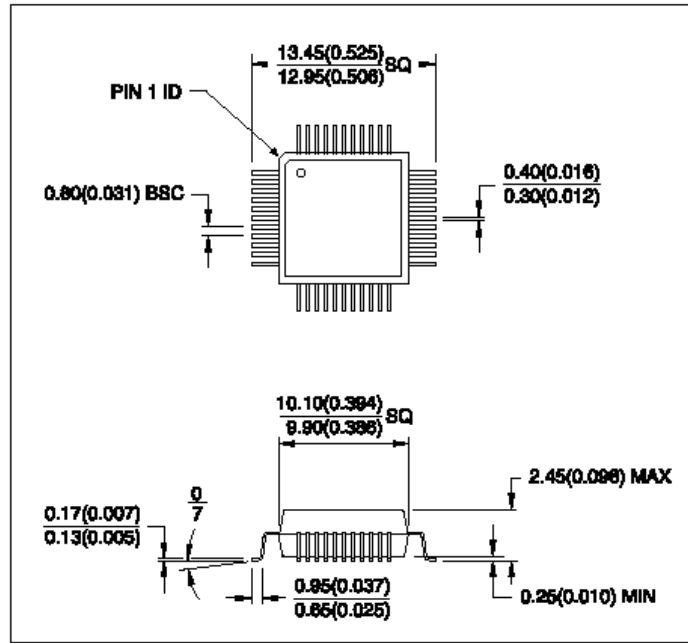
Package Drawing 44 Pin Quad Flat Pack (QFP-44)
